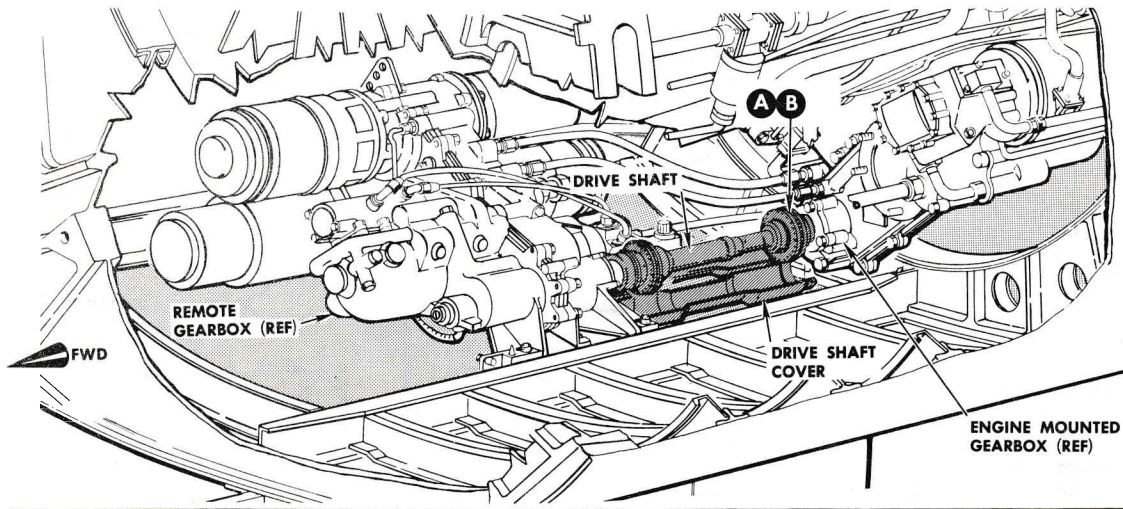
Replacement, Constant-Speed Engine Mounted Gearbox (Sheet 2 of 2)
